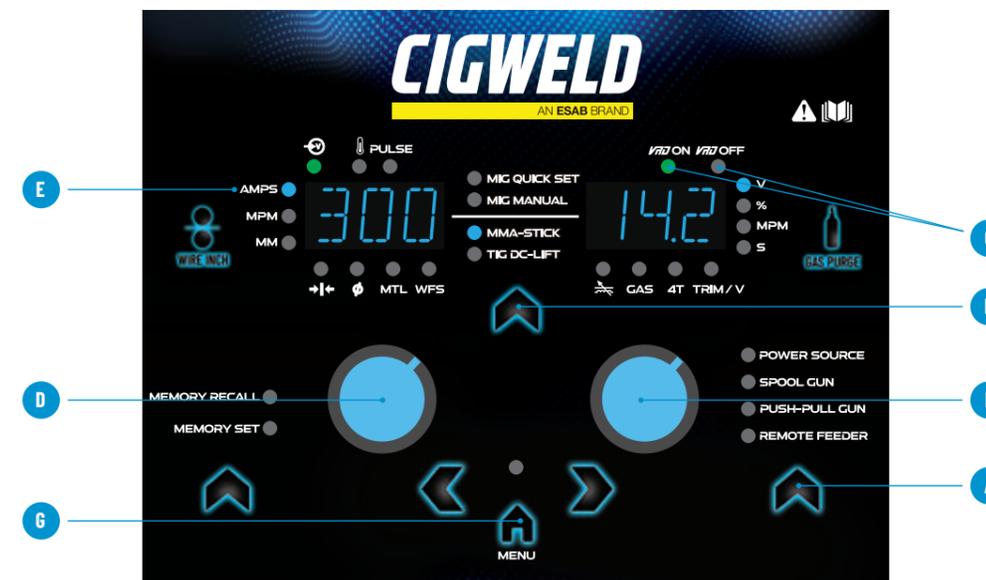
Setup for STICK (MMAW) Welding
